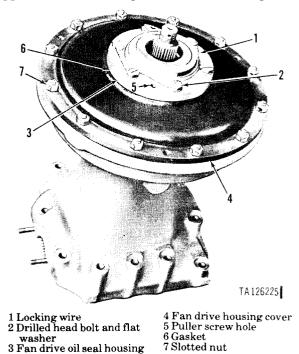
Removing or installing fan drive oil seal housing and fan drive clutch and cover.
